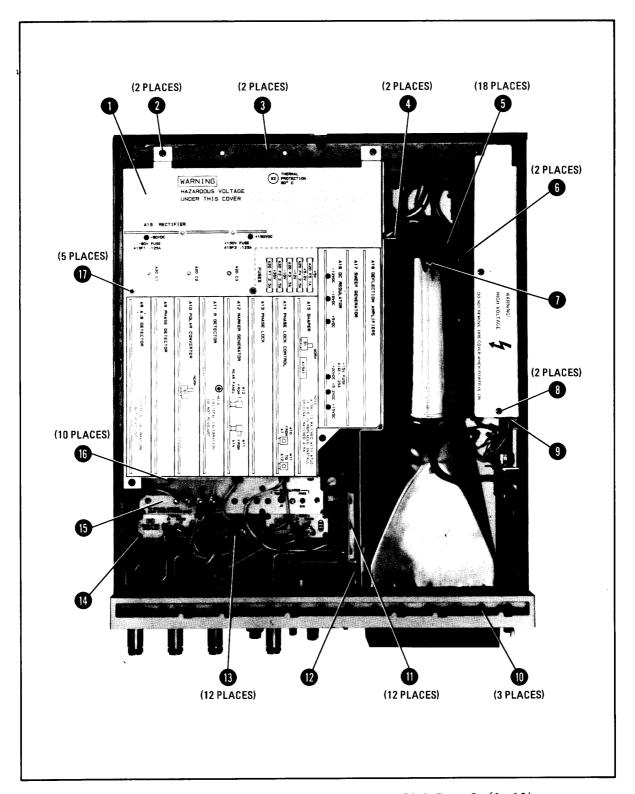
Illustrated Parts Breakdown, Bottom View With Cover On (1 of 2)
